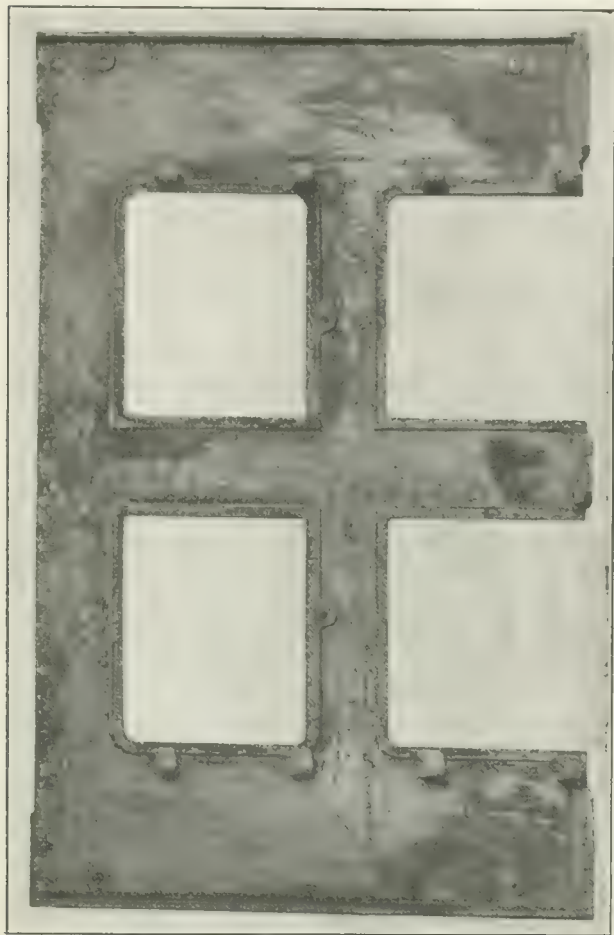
A Boiler Front Measuring 6 x 8 Ft. and $\frac{3}{8}$ In. Thick, the Mold for Which Was Made on a Jarring Machine Built by the Arcade Mfg. Company, Freeport, Ill.
